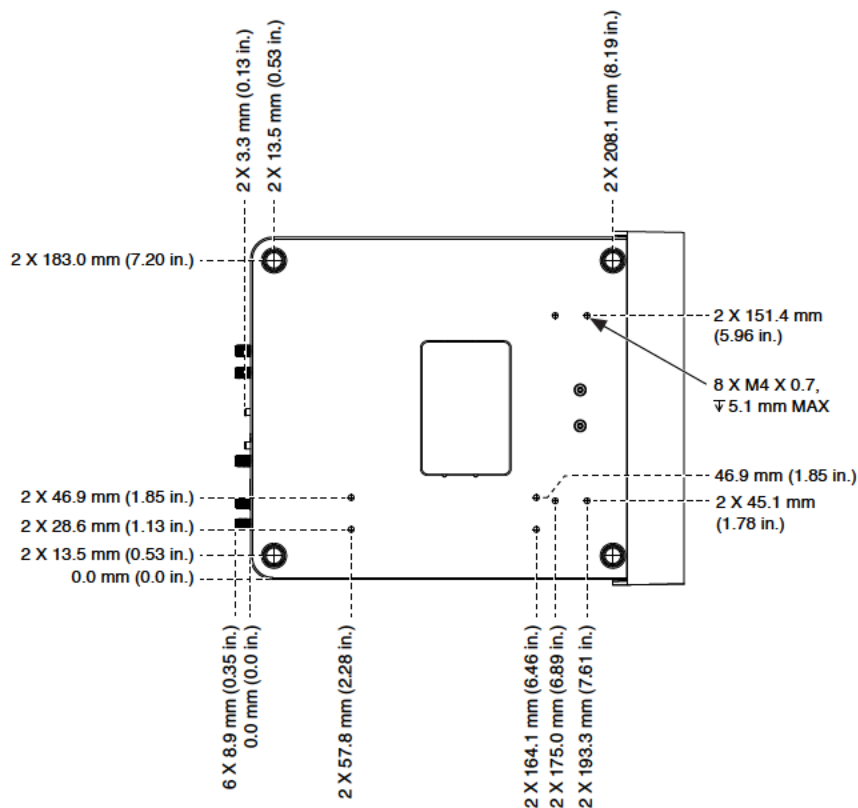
mmRH-5591 Laser Tolerance, Side View
